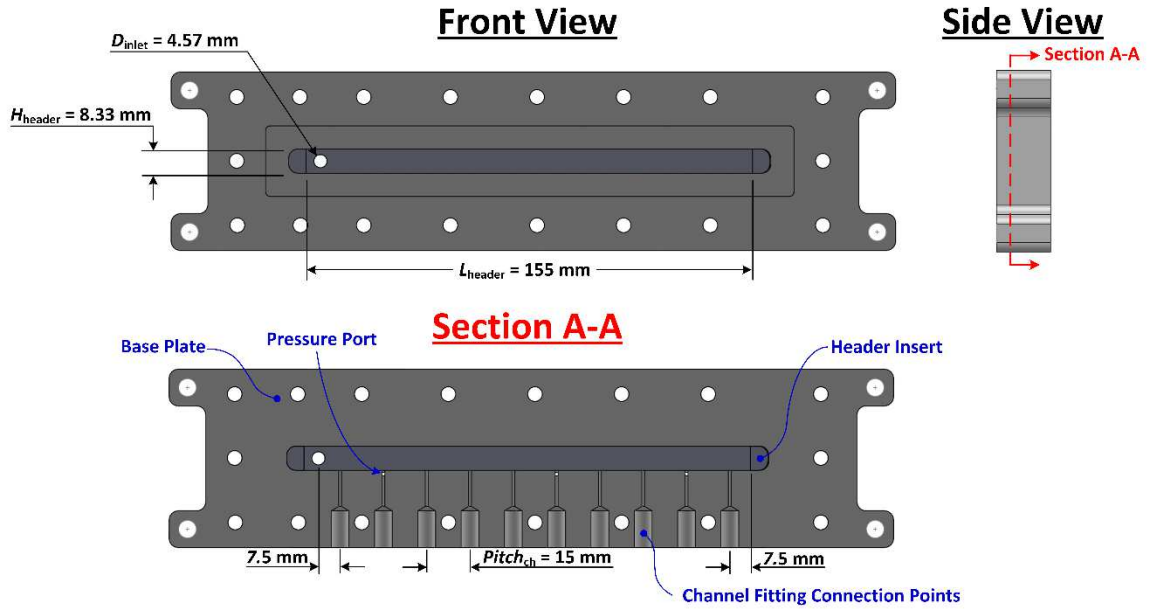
Detailed image of header base plate and insert with important dimensions
